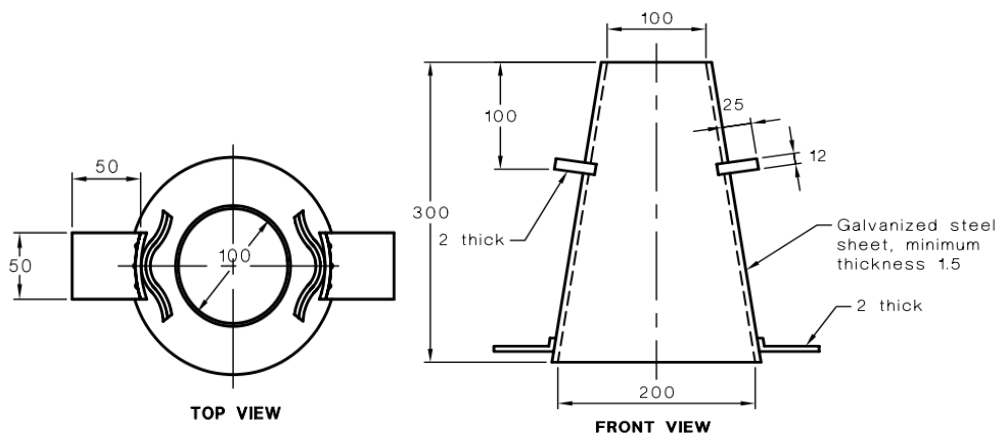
Typical mould used for the slump test (AS1012.3.1)
